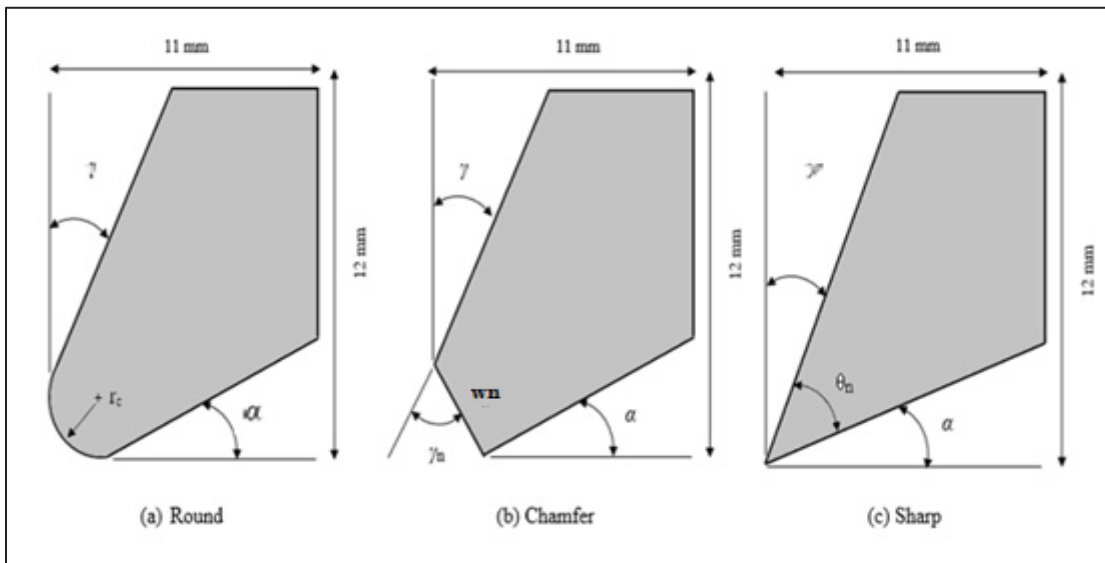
The 2D model design of cutting tool: (a) round (b) chamfer (c) sharp.
